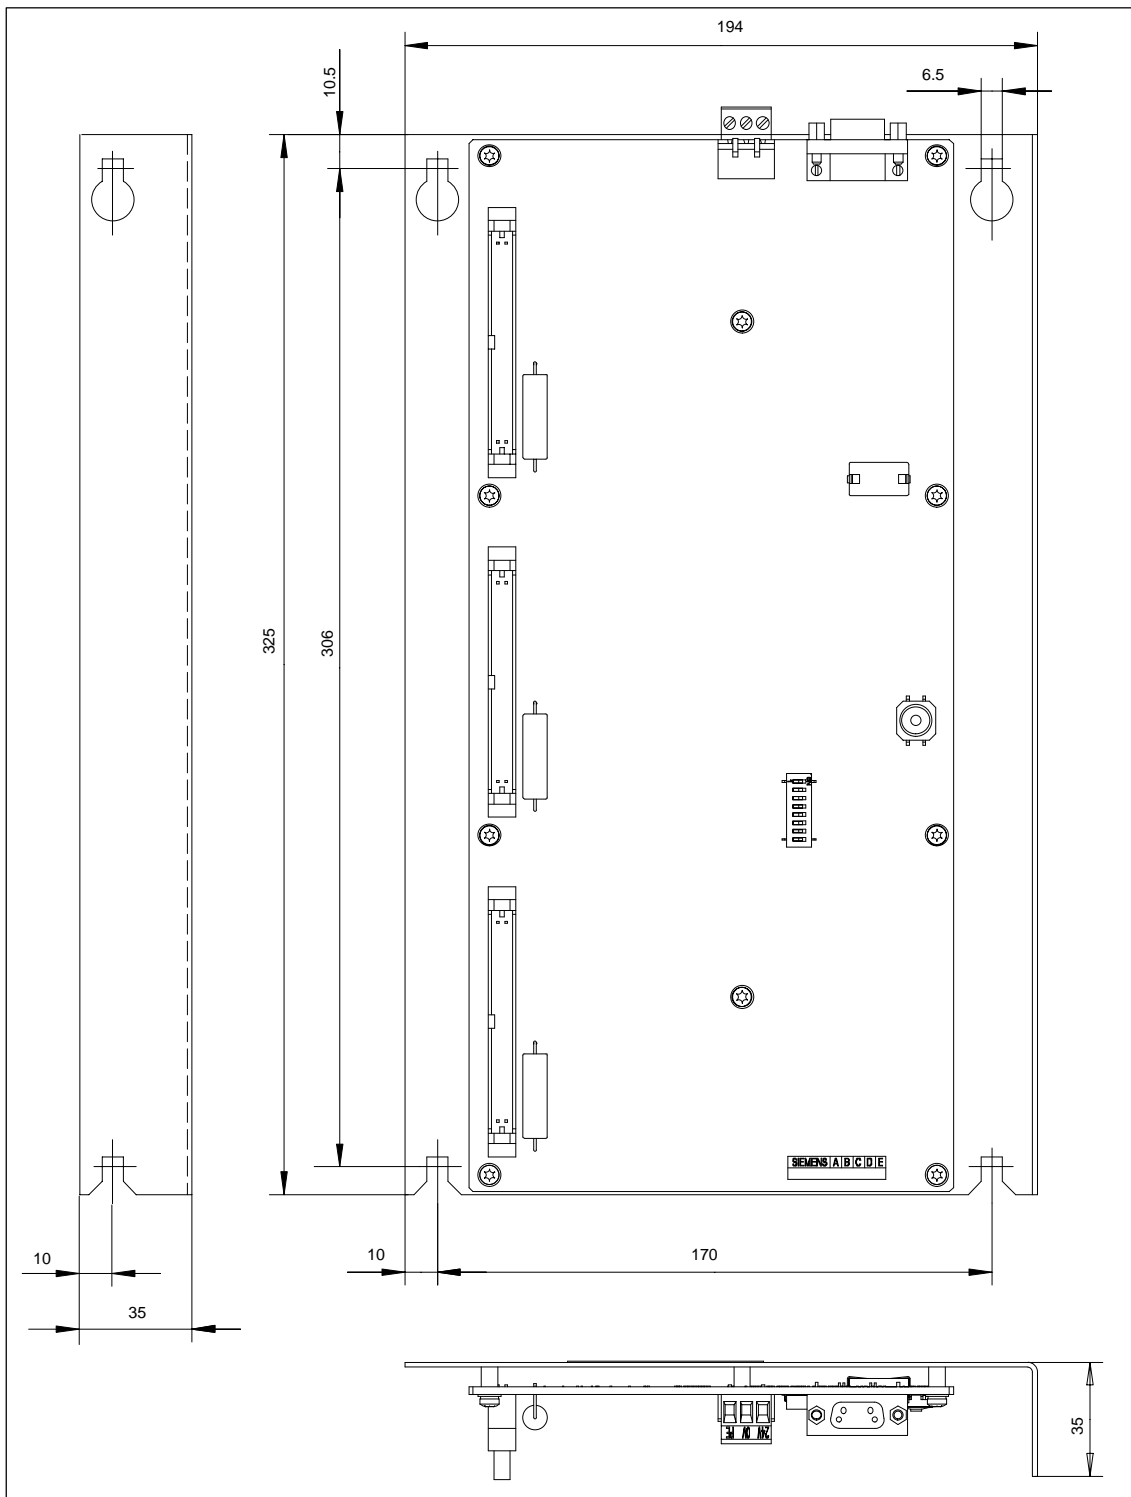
Dimension drawing: I/O Module PP72/48
